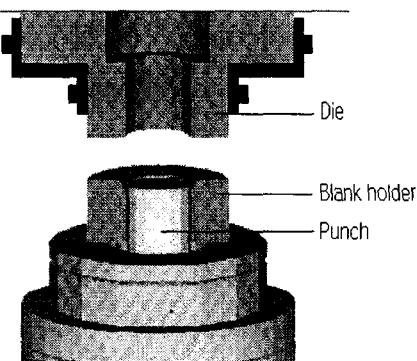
Cross-sectional view of geometric description of the tooling for deep drawing
